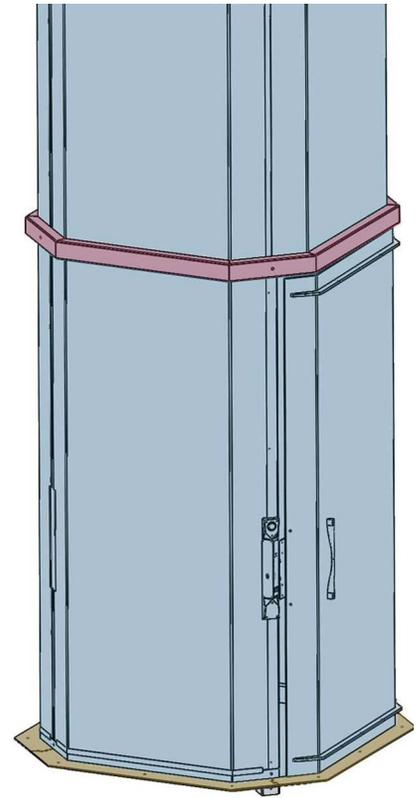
Plan view - octagonal acrylic (OAM) type 2
